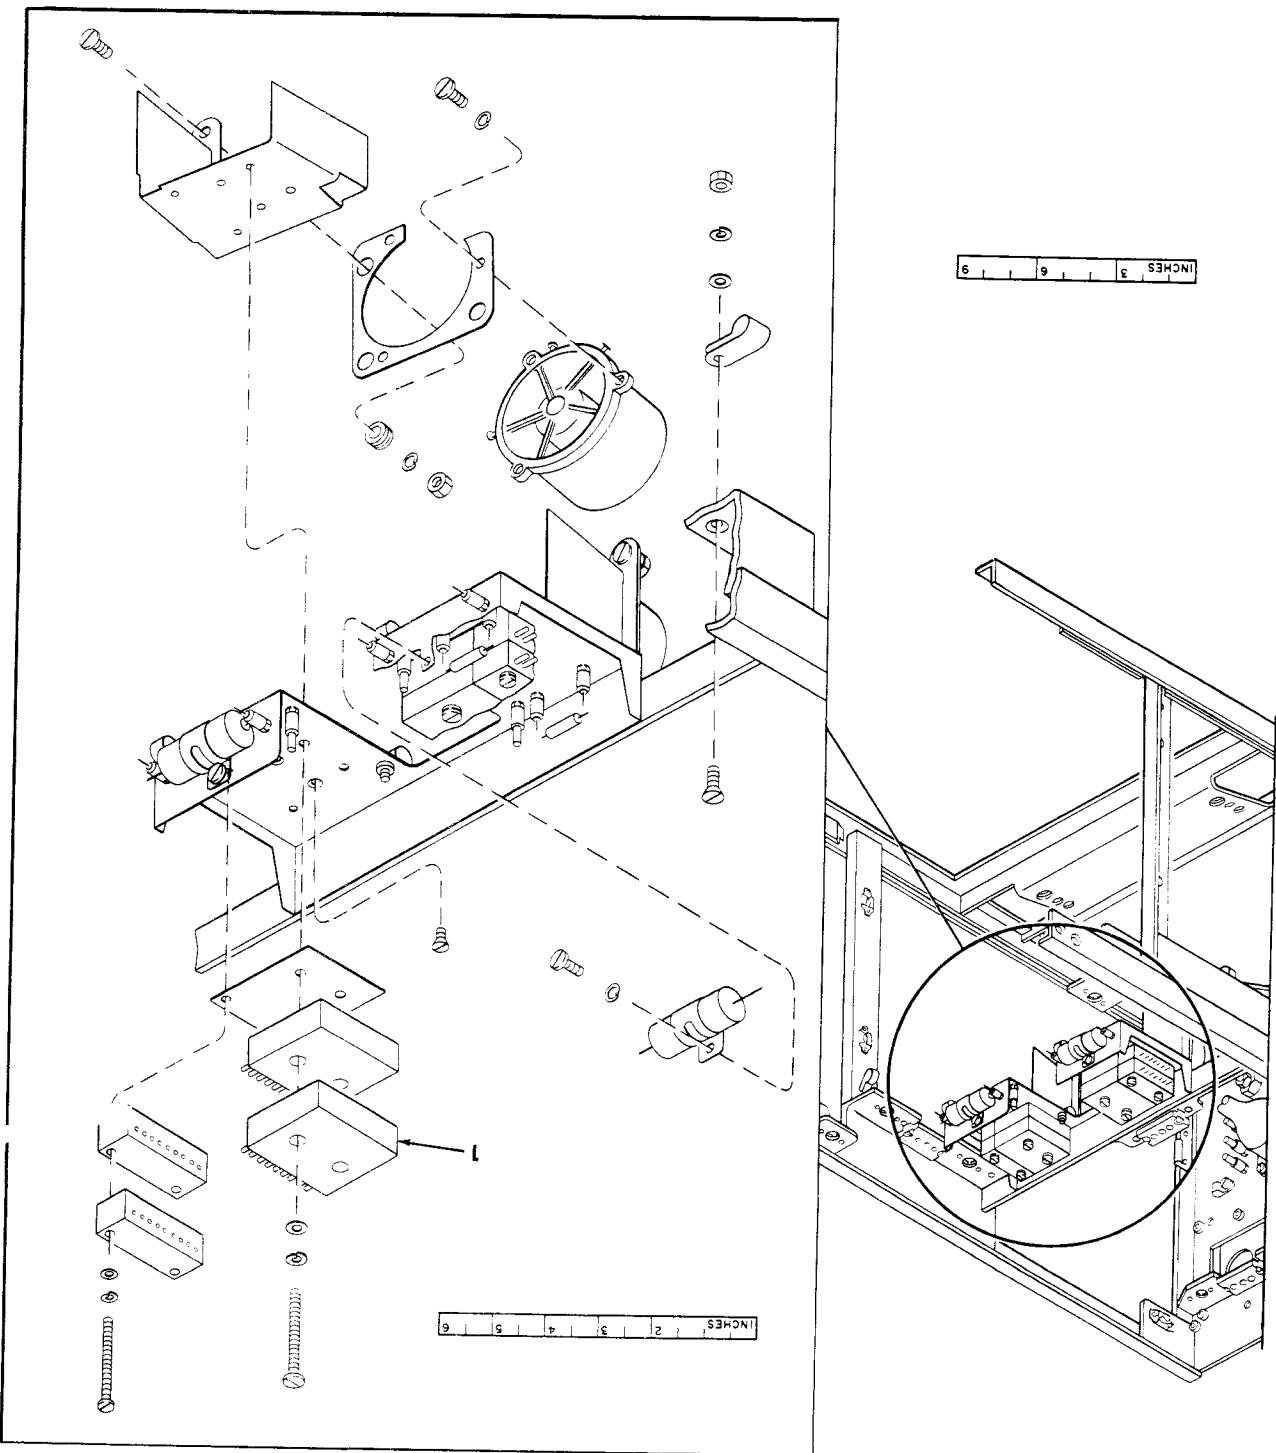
Indicator, azimuth range (9993732)—partial exploded view
